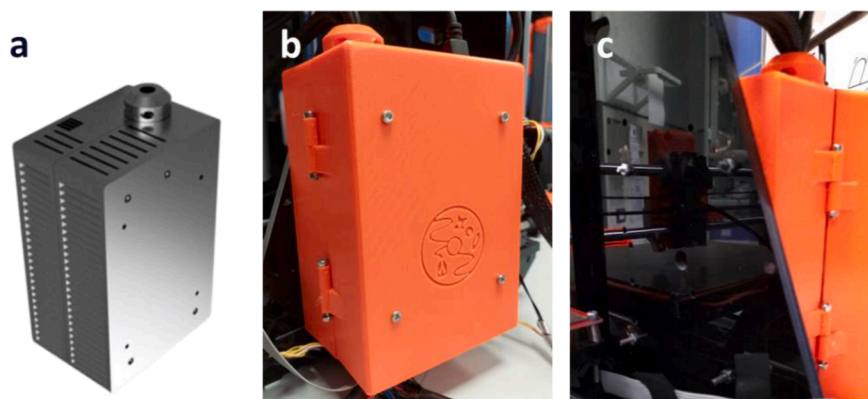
Mounting the cable and electronic box to the acrylic body of the 3D printer: (a) Render image of the newly designed box for cables and electronic main boards. (b) and (c) Installed cable box to the 3D bioprinter.
